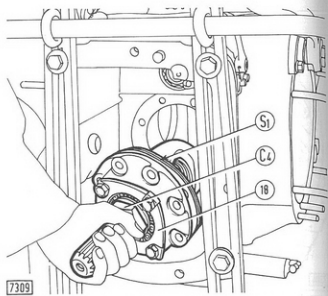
Dismantling (or Reassembling) Bevel Pinion Carrier
